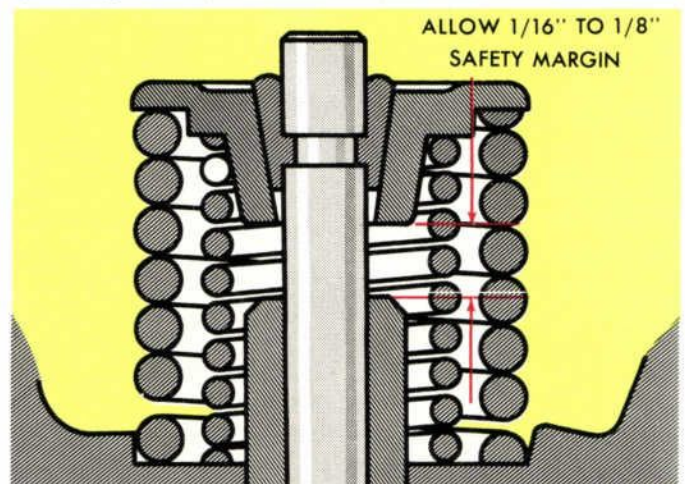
CHECKING SPRING RETAINER-TO-GUIDE CLEARANCE
